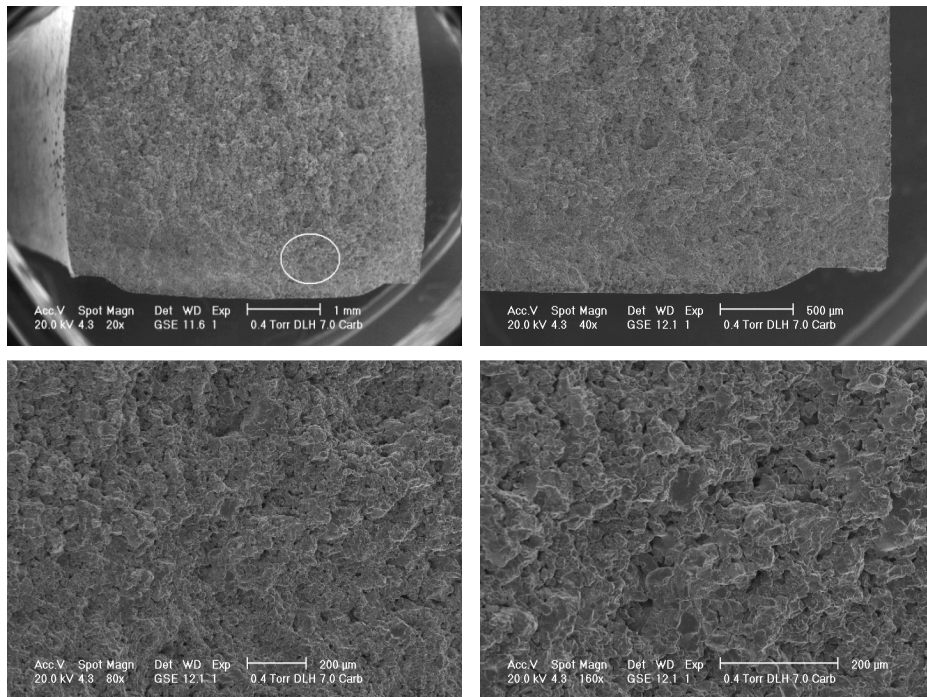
fracture surface of carburized 7.0g/cm<sup>3</sup> 0.2%C DLH
